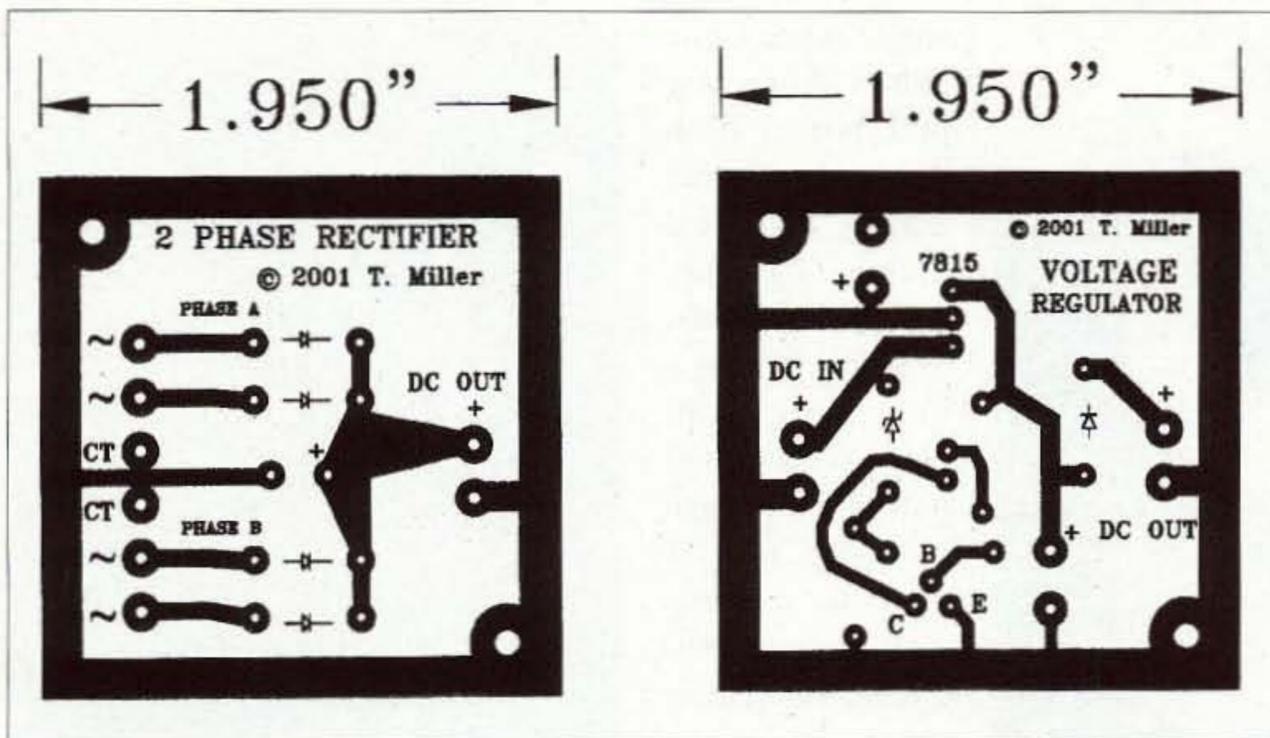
Printed circuit board patterns for the rectifier and regulator.
